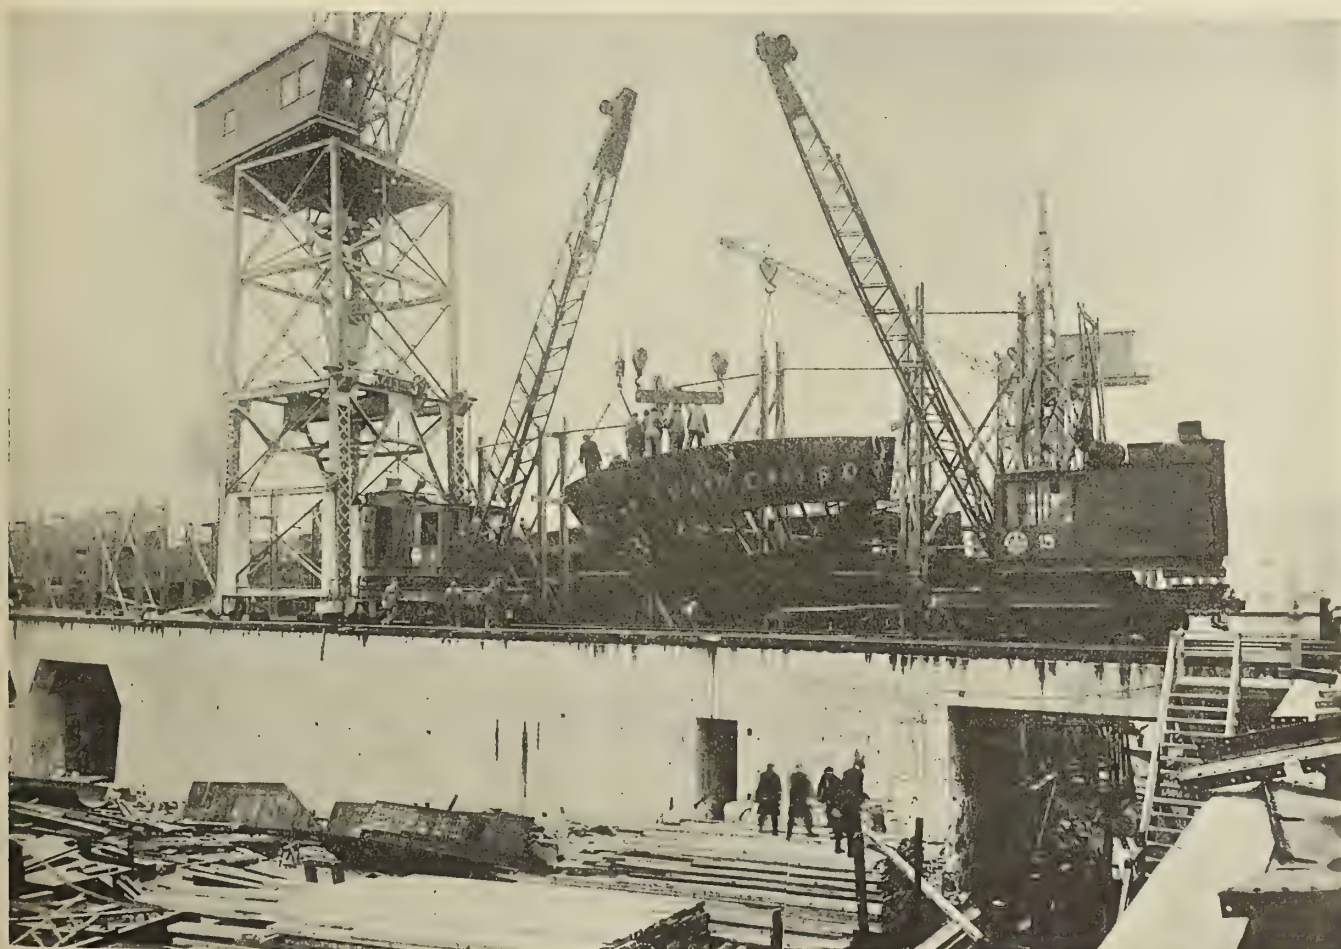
Waterfront of Groton Iron Works, Showing Building Ways, Fitting Out Berth and Shops
